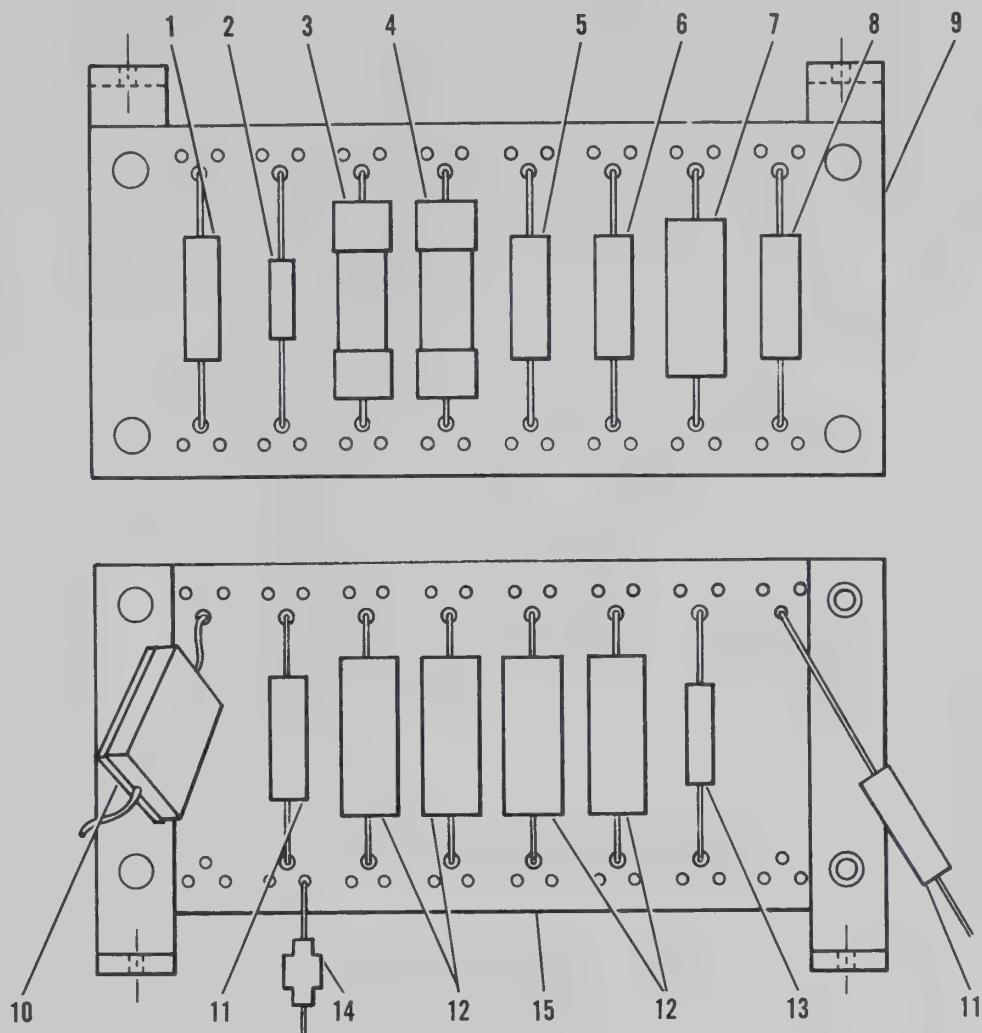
Printed Circuit Board Assembly, Part No. 400D-75G
